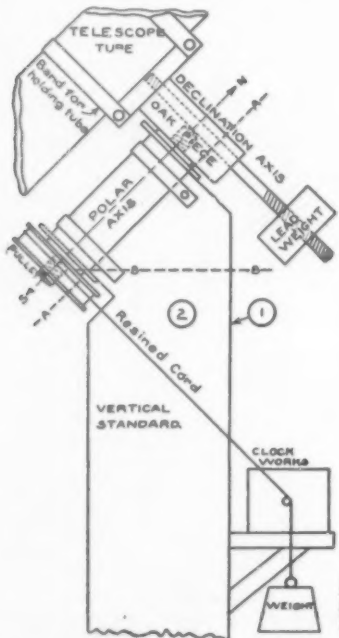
SIMPLE EQUATORIAL MOUNTING.
